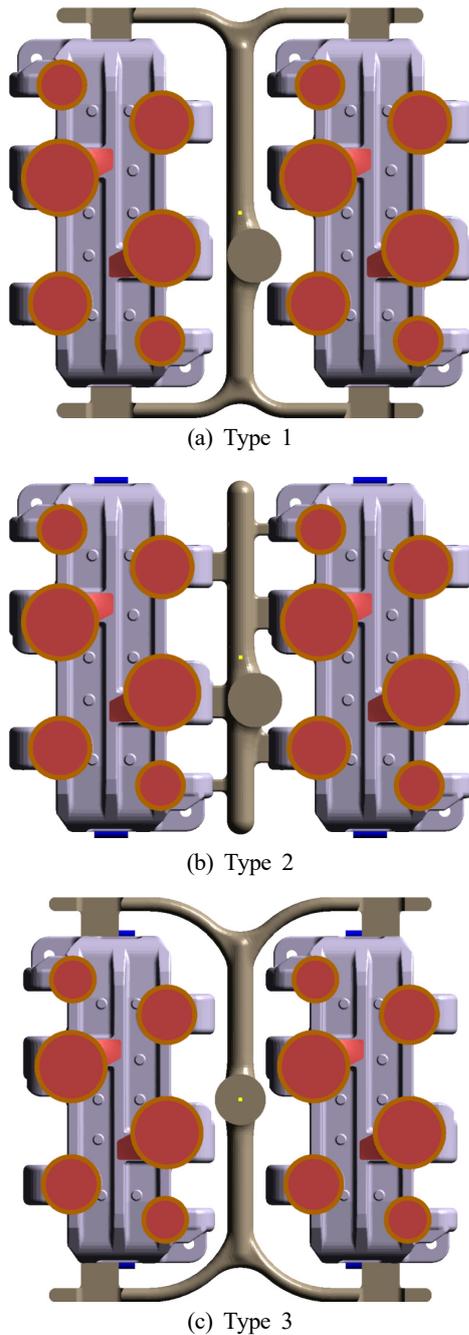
2 cavity casting process design of track shoe mold for super-large excavator caterpillar
